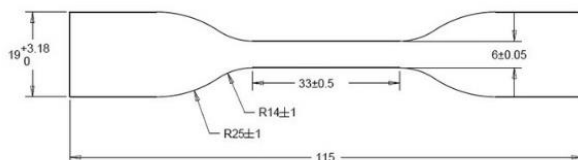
ASTMD638 - IV, details of the specimen dimensions (in mm).
